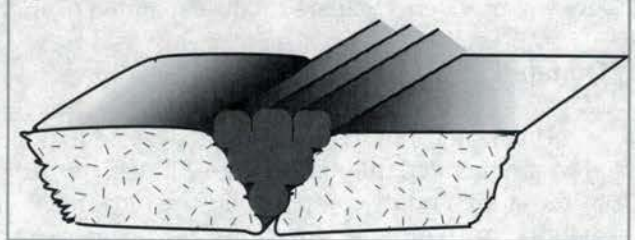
Burned Weld and Material Charred (Weak Weld)
